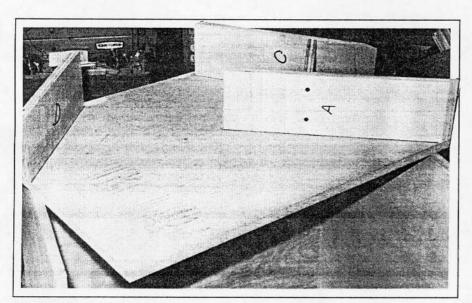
Parts A, B, C and D on the underside of the top board.
